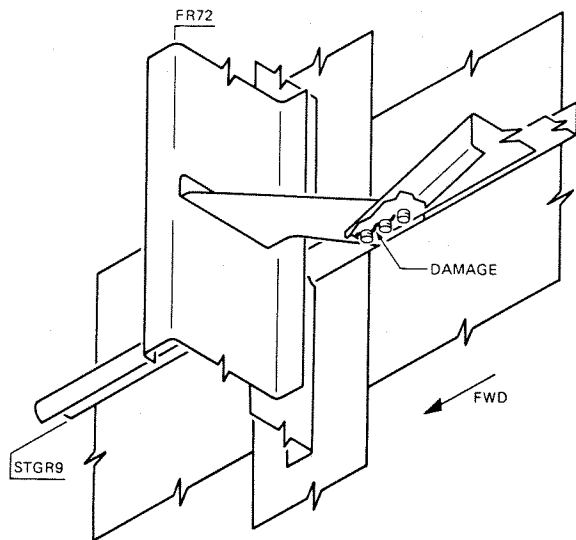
Fatigue Damage at Frame 72/Stringer 9
